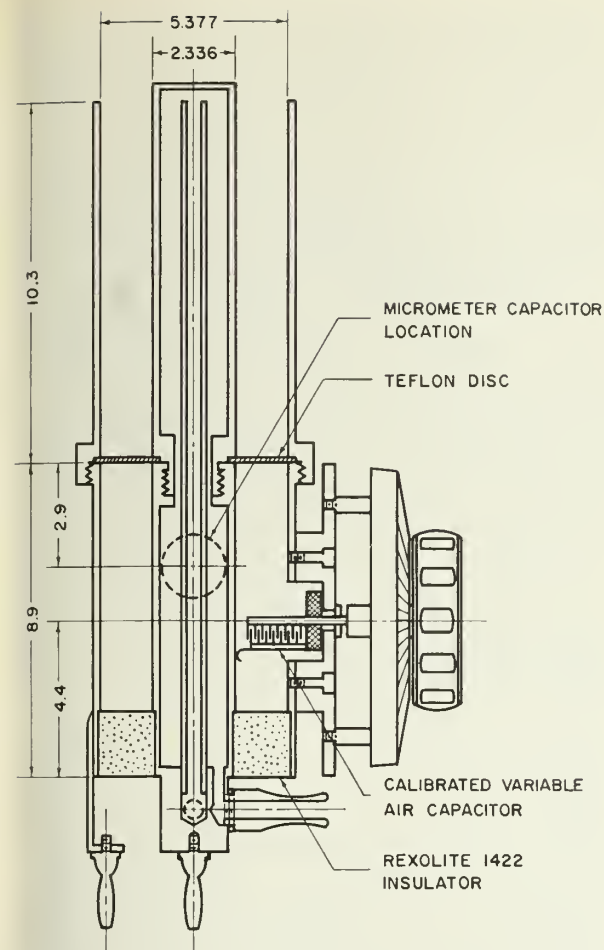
Sectional view showing details of construction of sample holder used with Q-meter for measurements at 20 MHz. Dimensions in centimeters.
